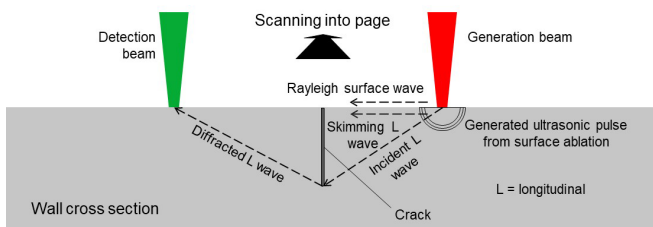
Cross-section through a canister wall, showing LUS configuration to determine crack depth profile.
